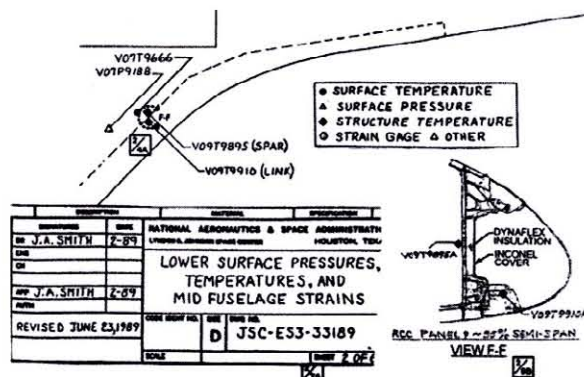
Portion of an Engineering Drawing Depicting the Location of OEX Sensors.
